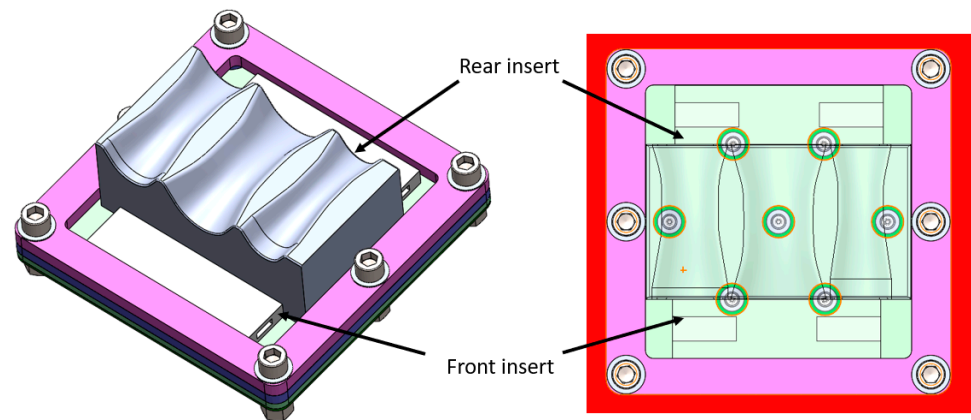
The digital twin of the die-holding assembly with front inserts for displacement blocking.
